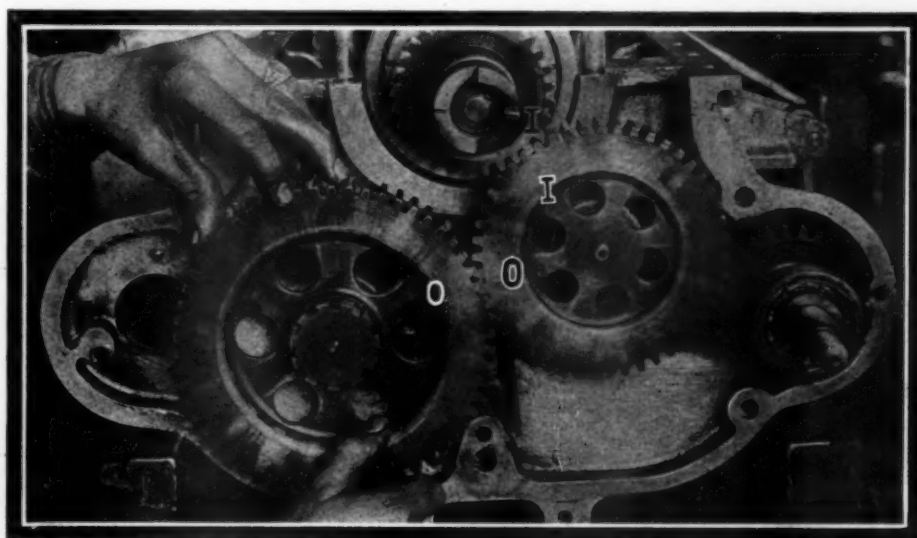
In order to obtain access to some other part of the motor timing gears may have to be removed. Makers usually mark these with some distinctive numbers. Before removing the wheels verify these marks to see if they correspond. After the marking in the assembly shop it may have been advantageous to alter the setting, in which case the marks, unless altered, will not act as a guide. (Photo taken at the White Company Garage)
